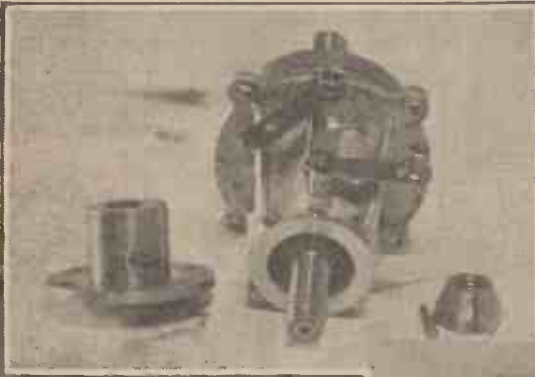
The crankshaft bearings, with the cone locking nut, propeller flange, and tappet.
